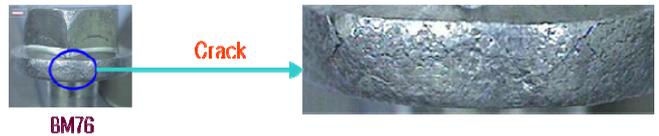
The crack in the age-hardened BM76 after bolt forming.
